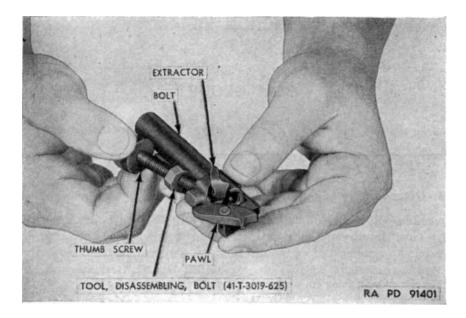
Disassembling bolt — carbines, cal. .30, M2 and M3.
